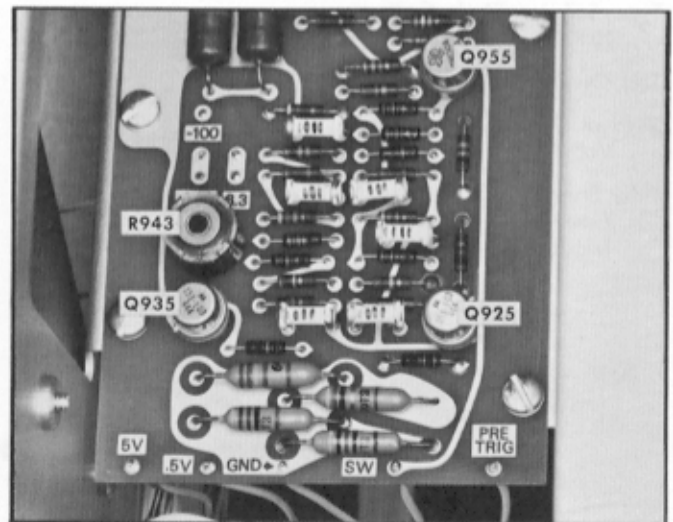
Top view Amplitude Calibrator circuit board.
